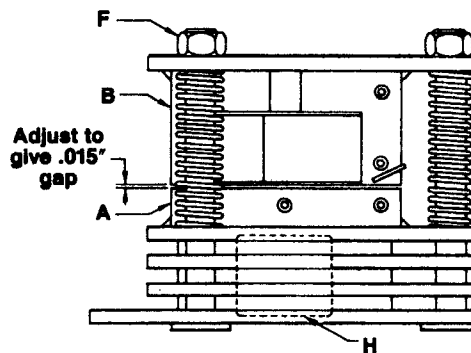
MOTOR BRAKE ADJUSTMENT
